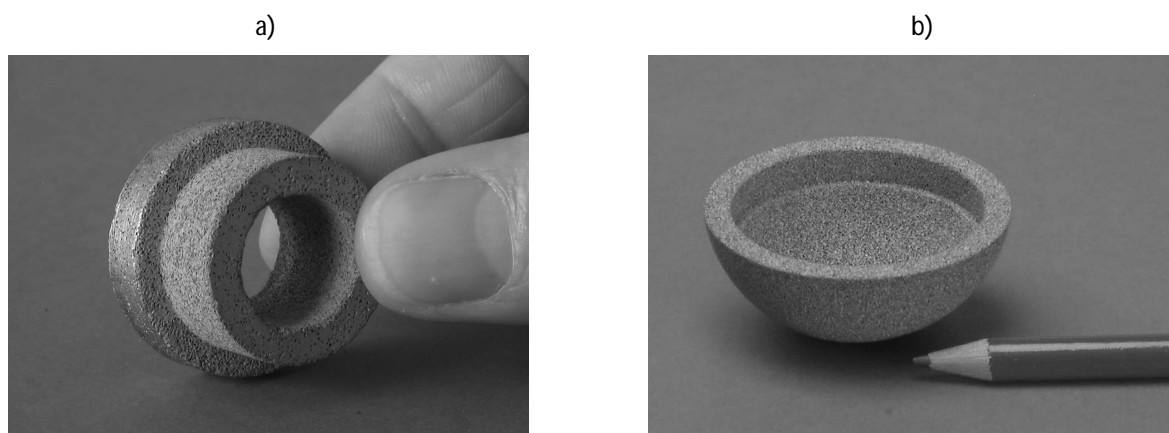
Surface of sintered porous titanium before (a) and after (b) machining
